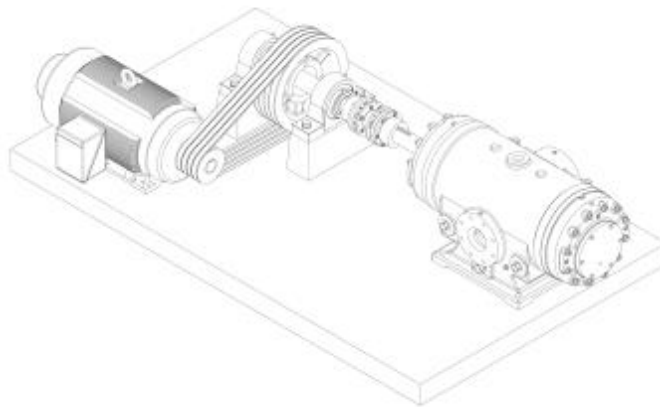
Typical arrangement for belt drives with pedestal bearings and a jackshaft.
